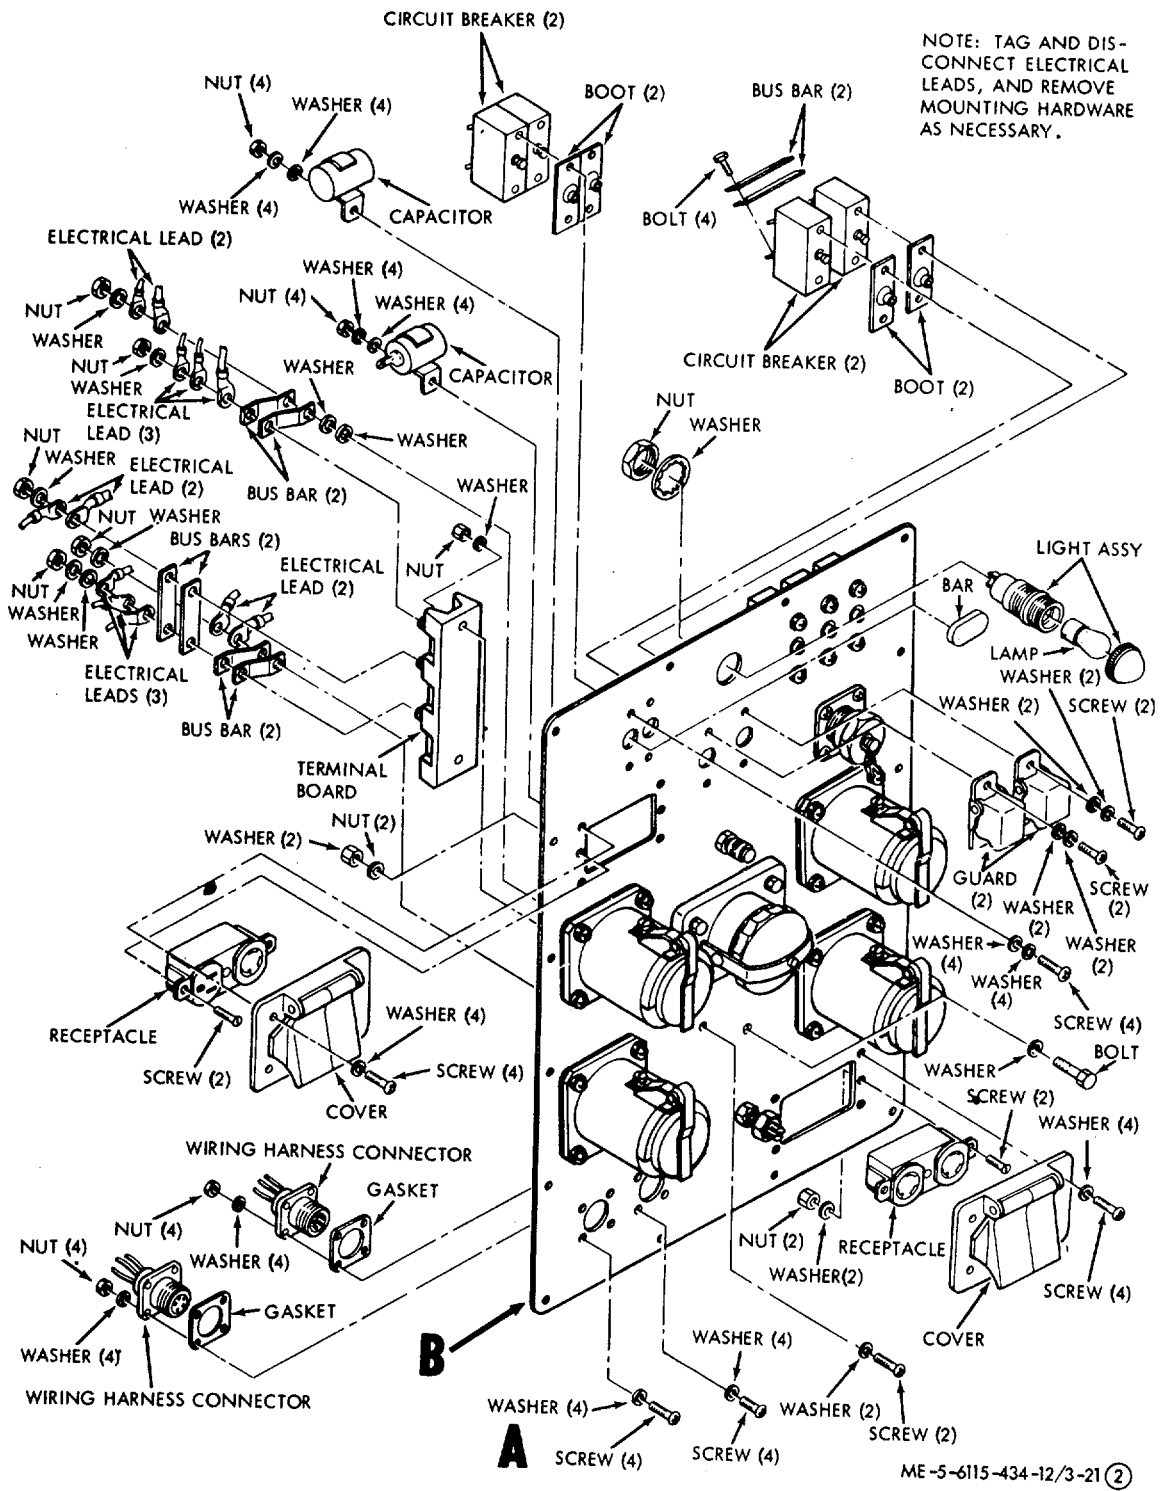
Receptacle panel assembly component replacement (Sheet 2 of 4)
